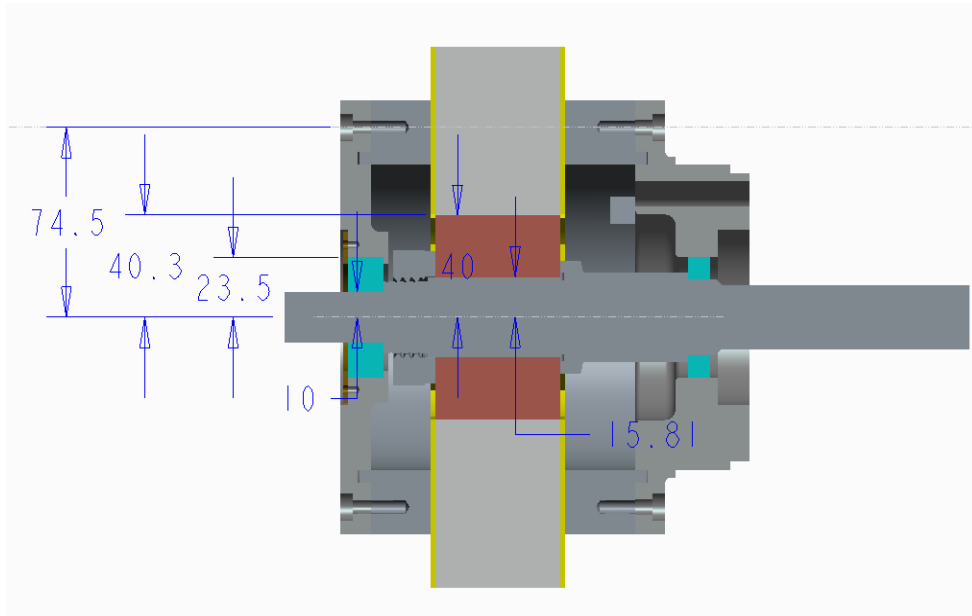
Interior SRM assembly stacking chain (dimensions in mm)
